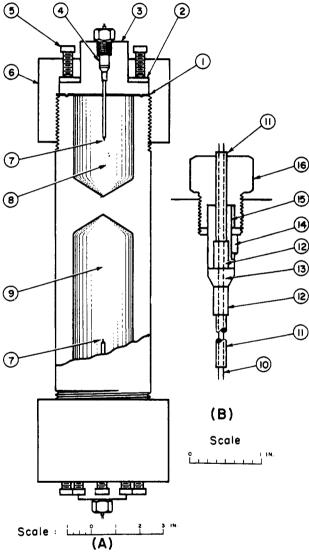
A is the Compressibility Cell, B is the Thermocouple packing assembly
